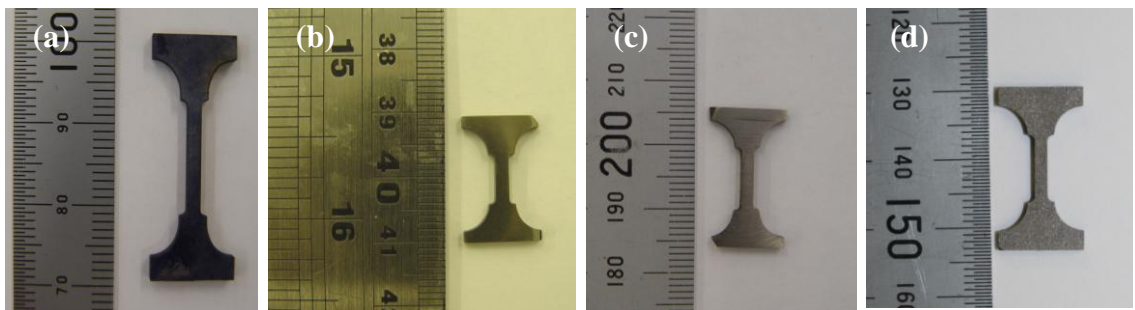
shape and size of the tensile specimens cut from: (a) Forge-1 sample; (b) and (c) Forge-2 sample; and (d) HIP-2 sample.
